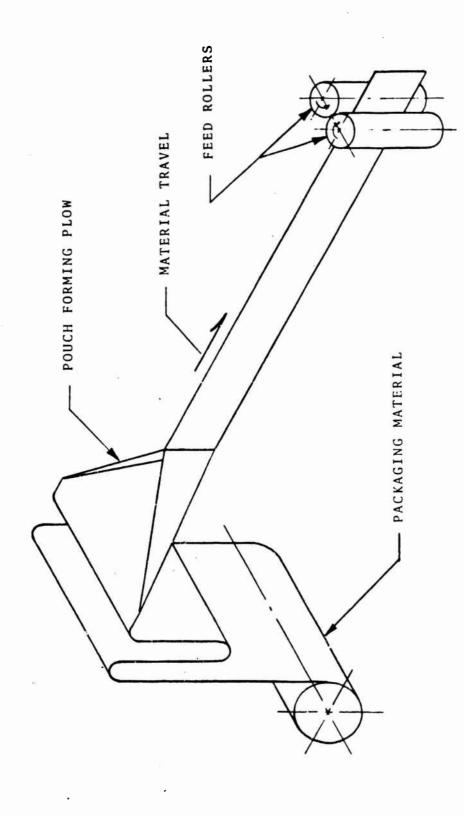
SCHEMATIC DRAWING OF POUCH FORMING
